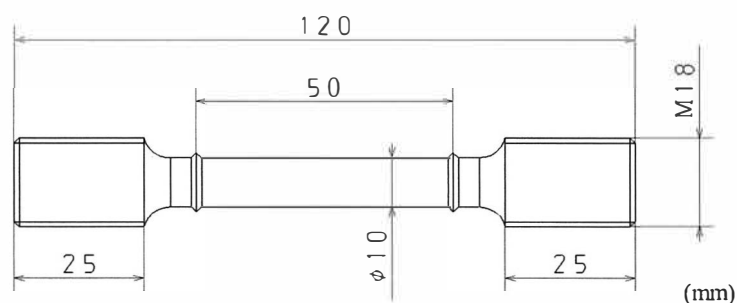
Tensile test piece shape and dimensions. (673K and 1073K.)
